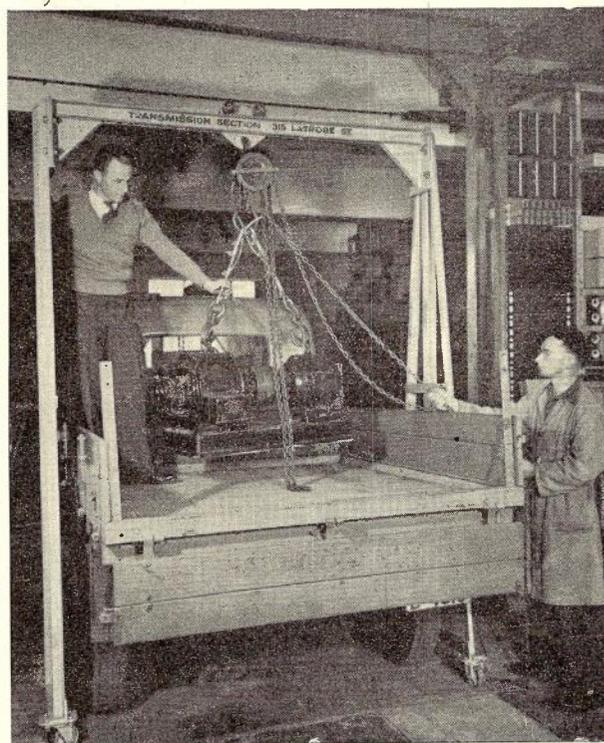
Portable gantry—long assembly—being used to load motor generator set into truck. Note use of sling and shackle assembly.
